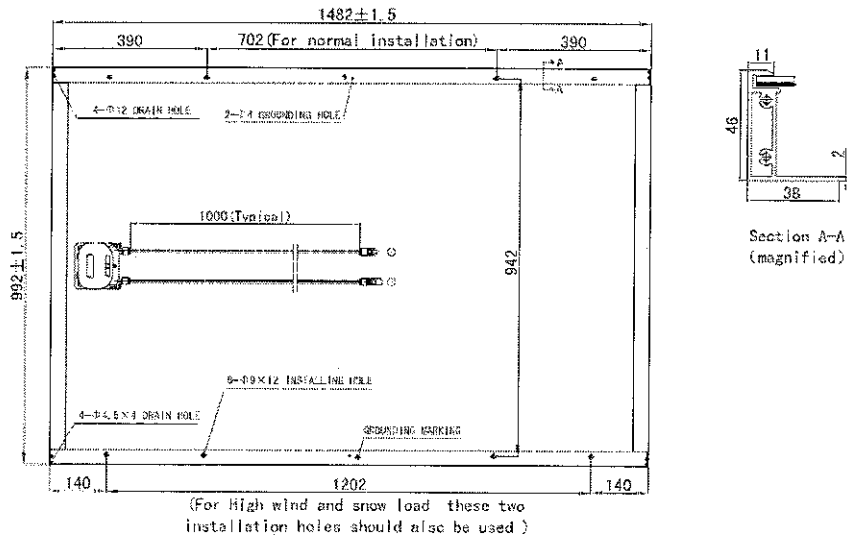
Back View of 6*12-125mm- 72cell SPV Module
